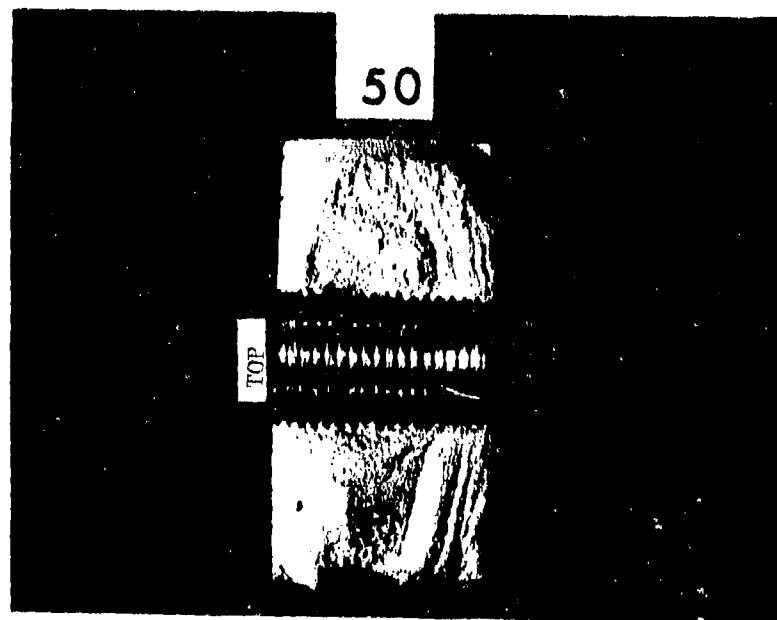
Close-up of Fatigue Failure of Specimens with Hell-Coil 3/8-24 Size Inserts. Inserts Installed by Manufacture. Torqued Bolts in Inserts During Test
